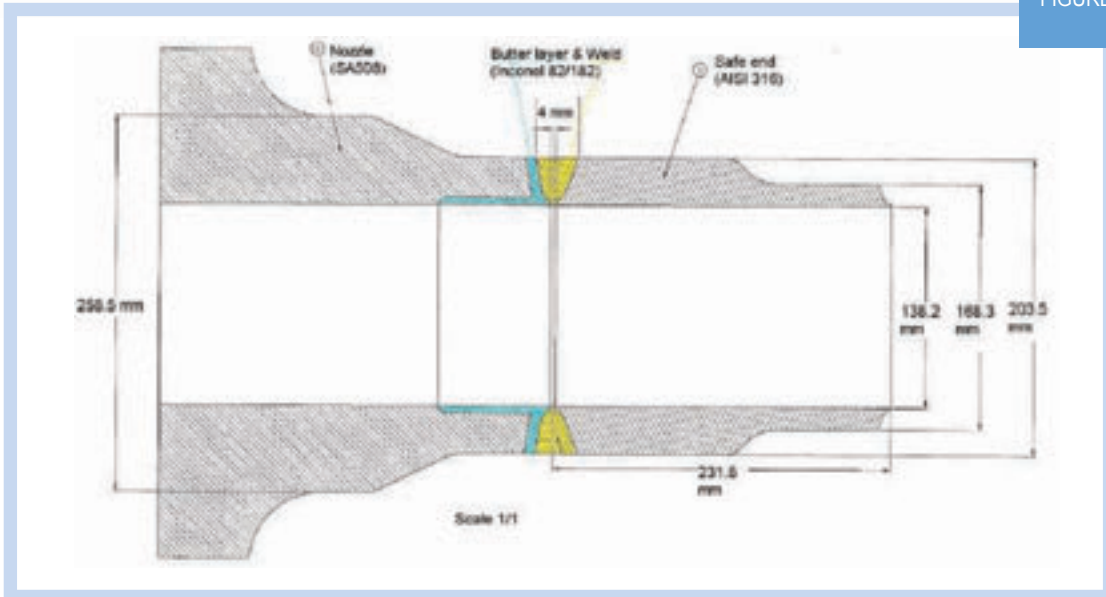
Section view of dissimilar weld. Nozzle attached to pressure vessel end-cap.
